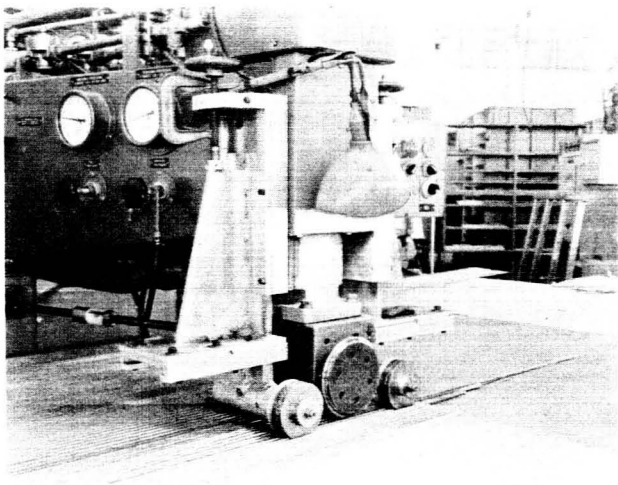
WELDING OF CORRUGATIONS TO FACE SHEET
